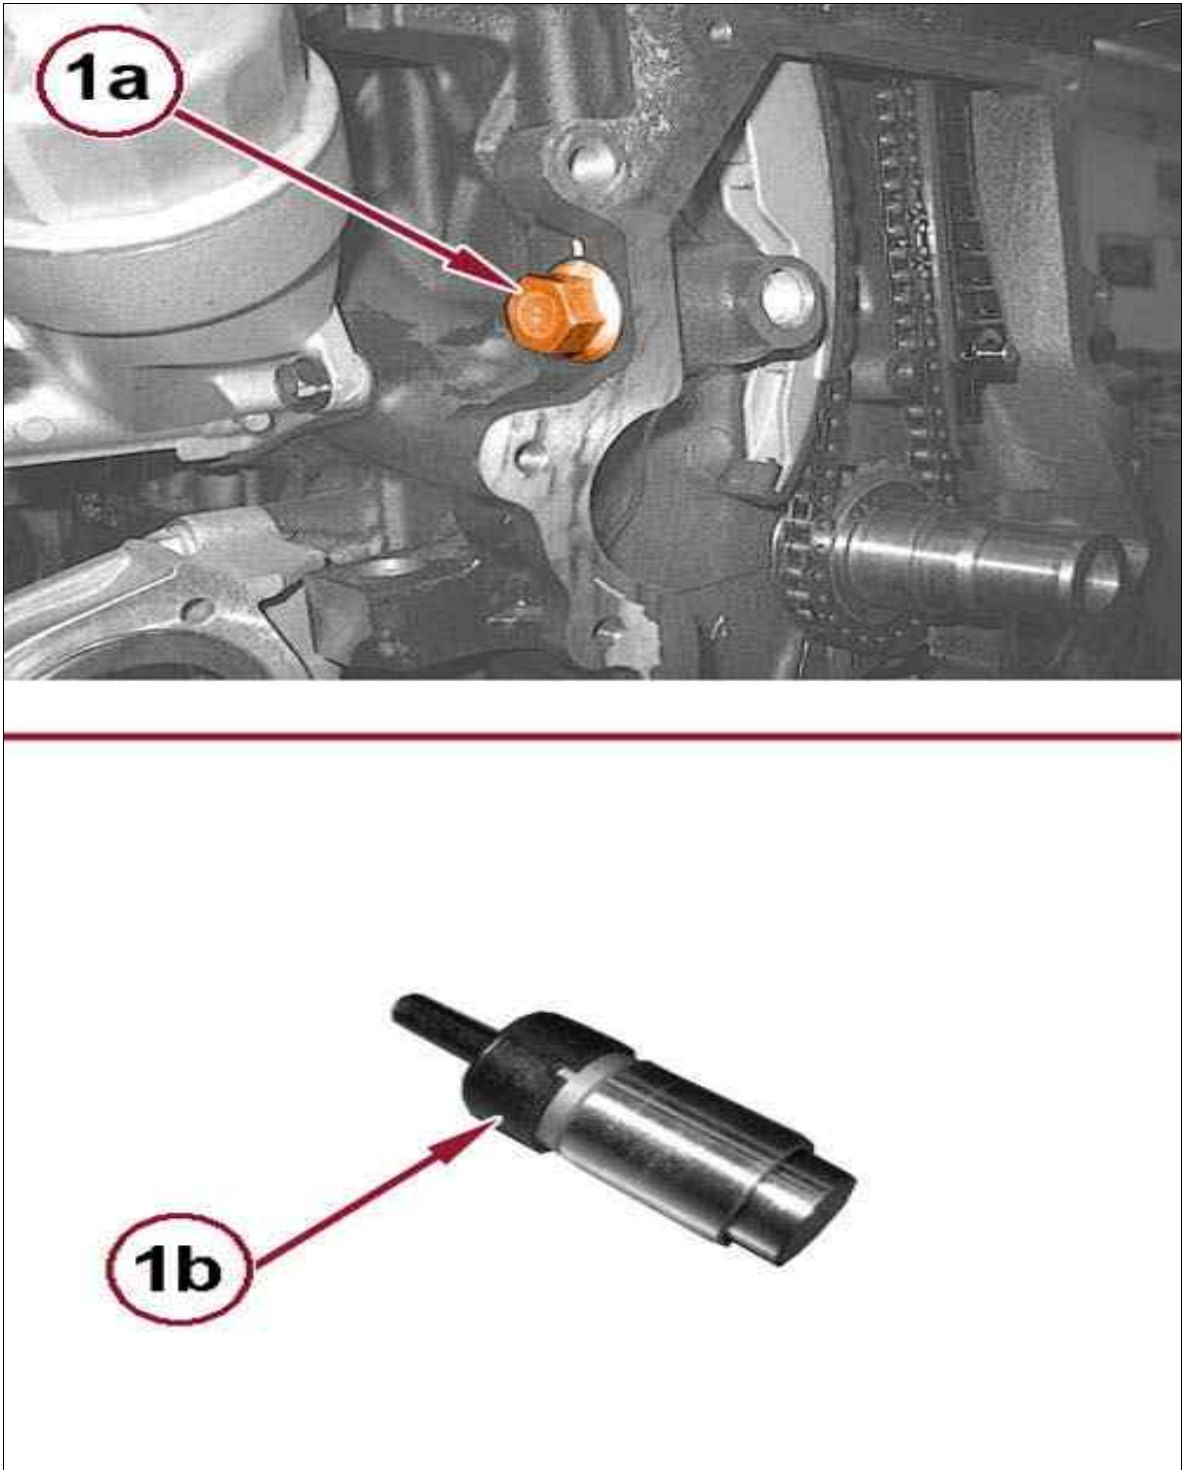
Variable Valve Timing System And Toothed Wheel For Timing Sensor & Bolt
